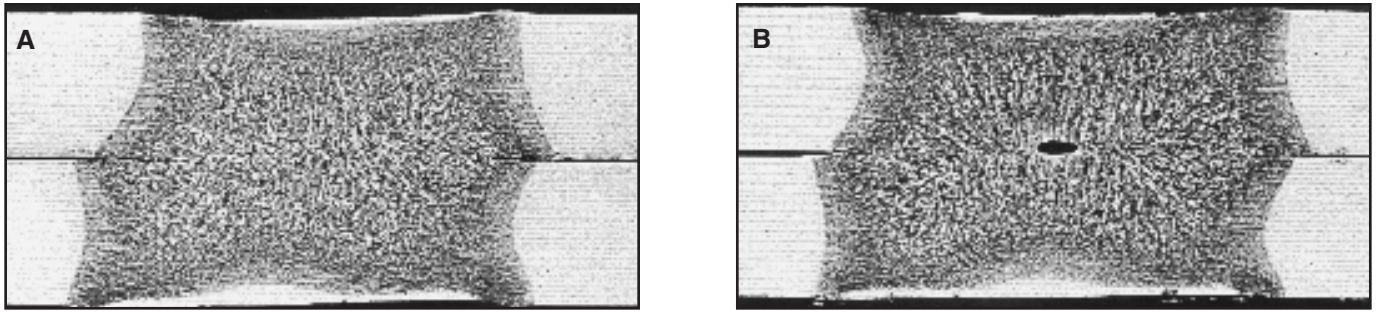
Weld cross sections with different friction (1.7-mm steel). A — Without additional friction; B — with additional friction.
